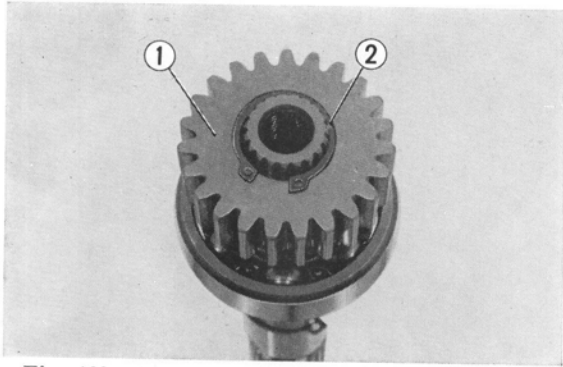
① Primary drive gear ② 20 mm snap ring
